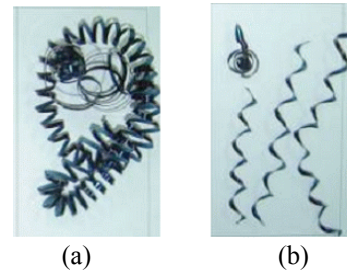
Cutting chips with powder compaction insert (a) and powder injection molding insert (b).
